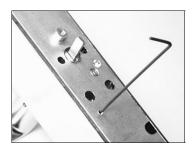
Use 1/16" hex wrench to screw in the cylinder back stop screw
